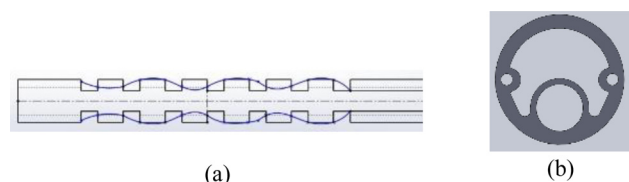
(a) Bending section of insertion tube showing how the angulation wire is weaved through the cuts and (b) a proposed multilumen medical tubing cross section
